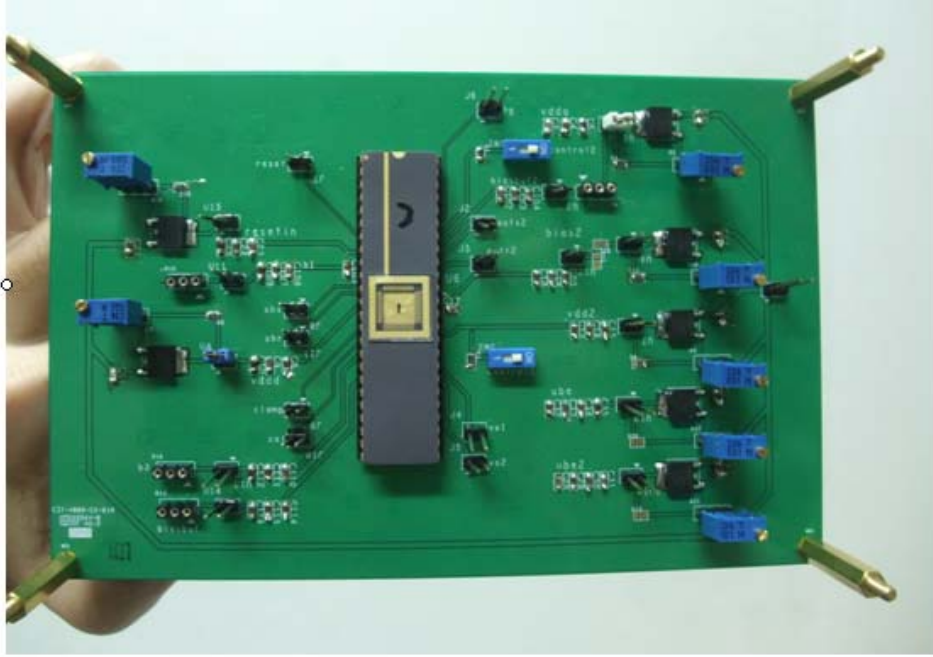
The PCB design of 3T and 4T voltage mode sensor test-chip
